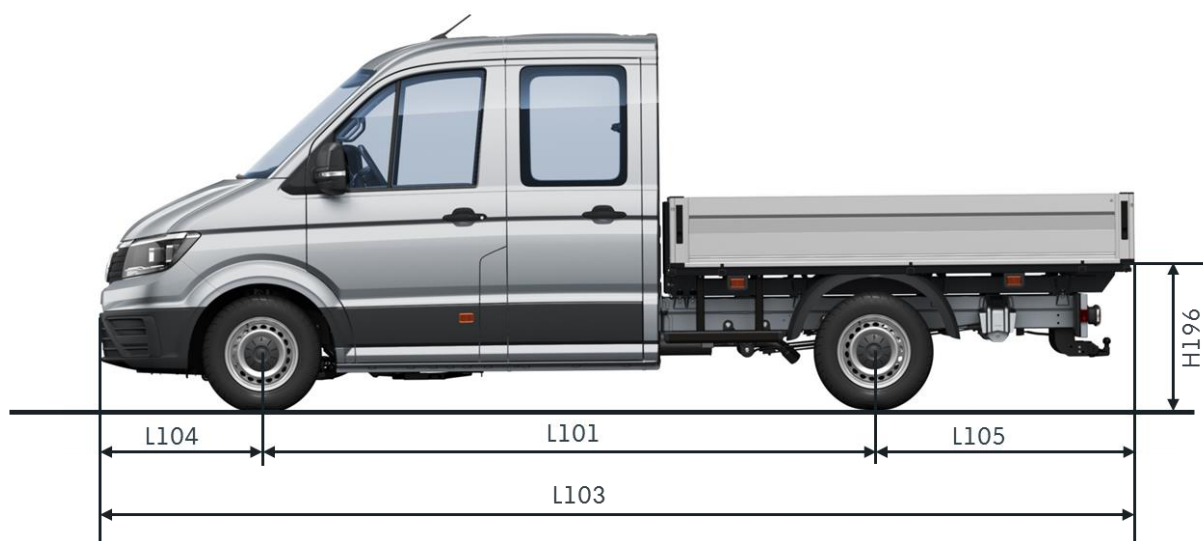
Vehicle dimensions, double cab – platform van / side view
